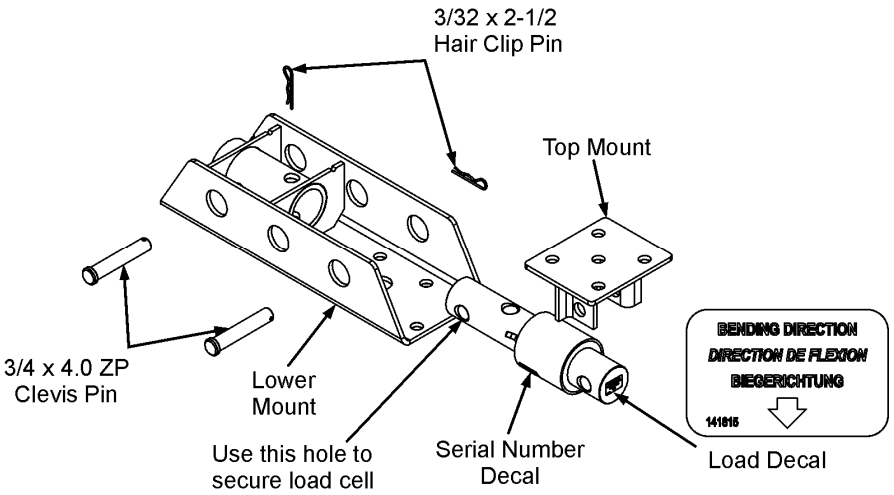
1-7/8 & 2-1/8 DB Assembly
